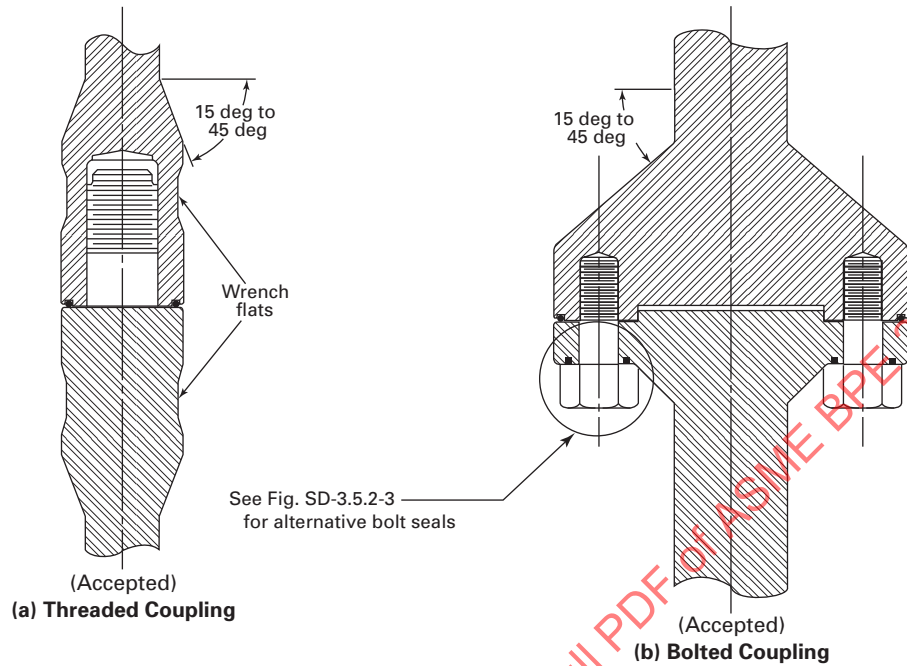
Shaft Coupling Seal Arrangements
